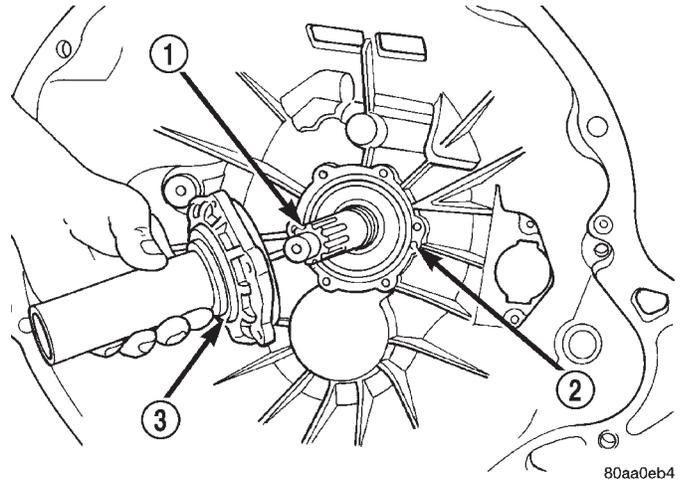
SEAL BEARING RETAINER AND HOUSING
